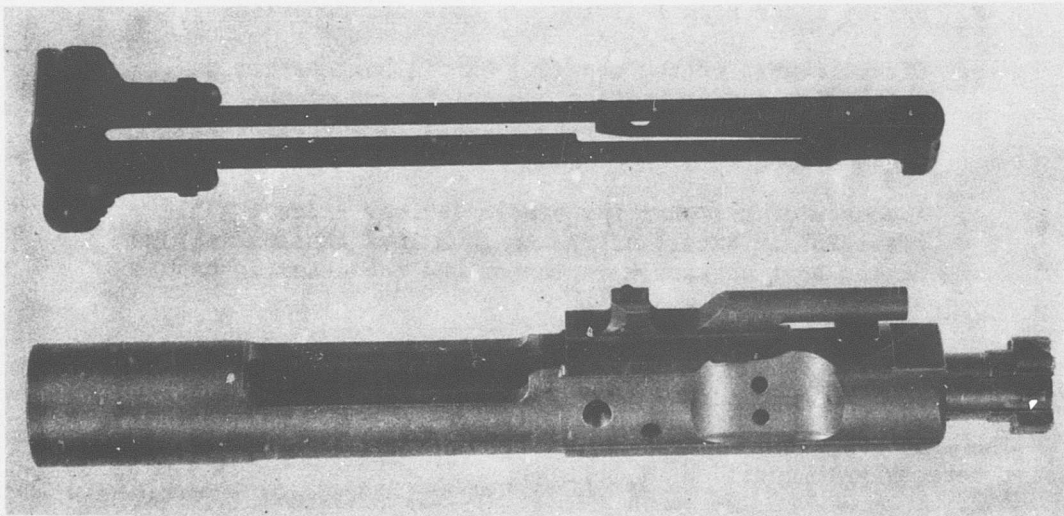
Redesigned Charging Handle with Two Locking Latches, Vertical Pad at Rear End, and Spring at Top Front. Note Plunger Incorporated in Bolt Carrier Key, in Line with Slotted Hole in Charging Handle Spring.
